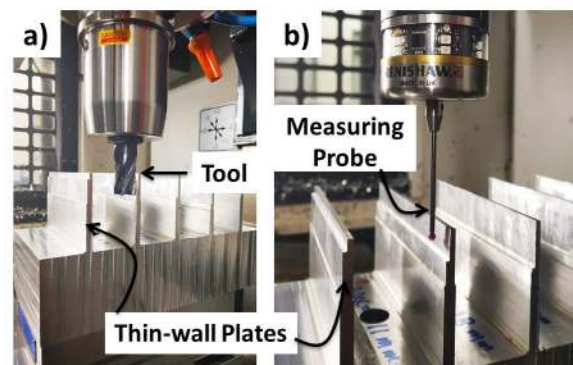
Experimental Setup: a) Machining Setup; b) Measurement Setup
